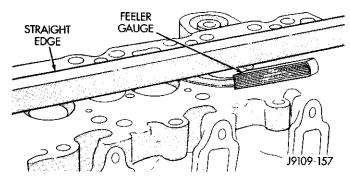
Cylinder Head Combustion Deck Face Measurement
